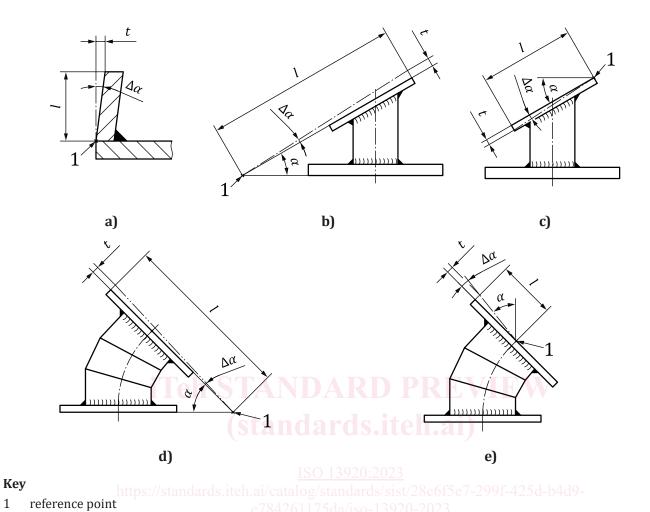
Examples showing how the shorter angle leg, *l*, is represented
